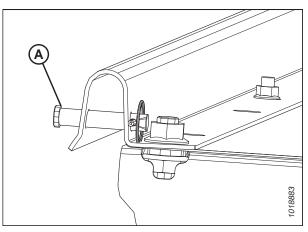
Clevis Pin at Forward End of Forming Shield
